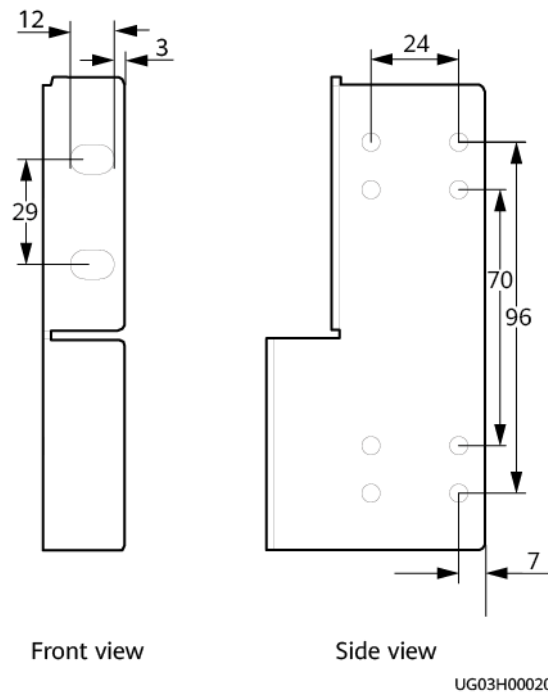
UPS mounting ear dimensions (unit: mm)
